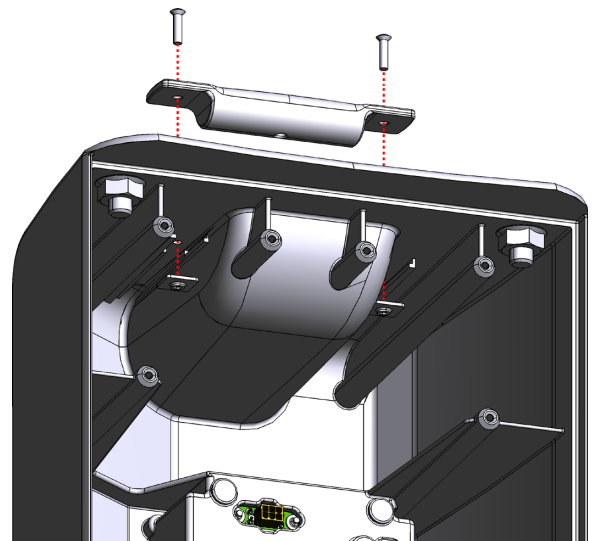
Handle, screws, and mounting plates inside the enclosure.
